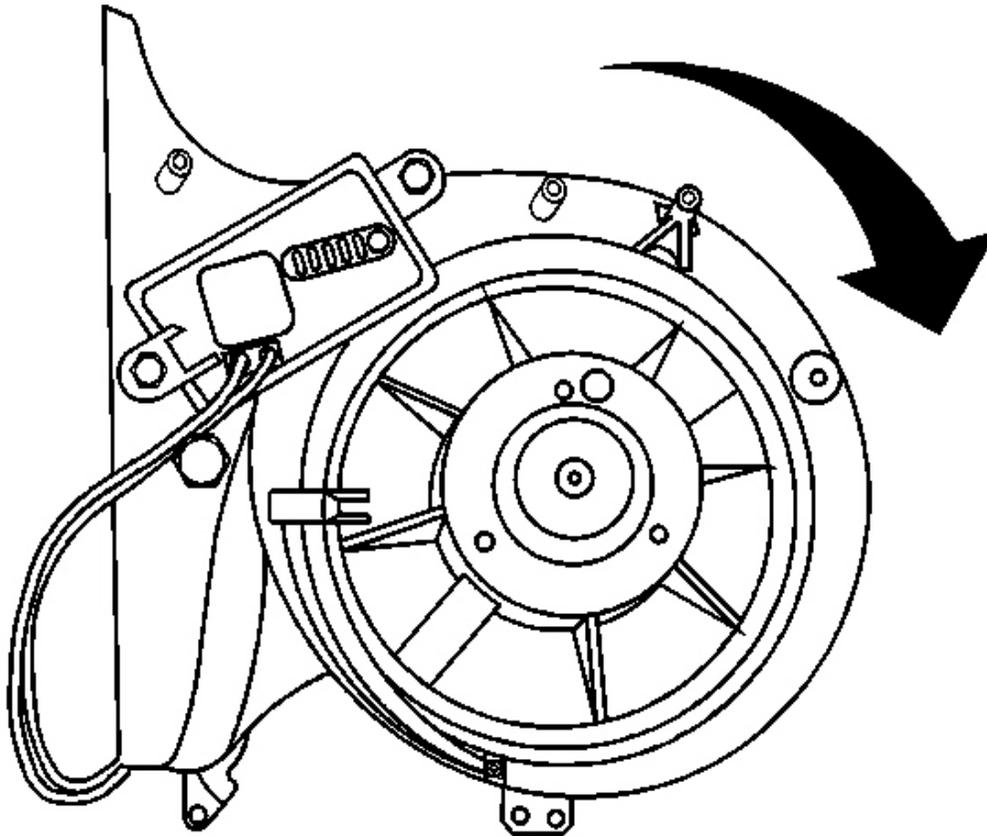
Turning Blower Assembly Clockwise (Delphi)
